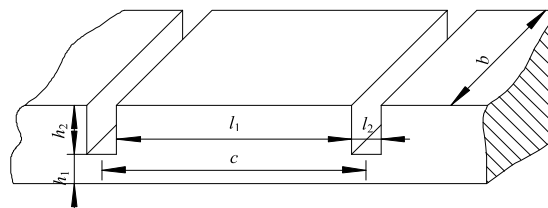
Partial enlarged drawing of vibrator tooth.
